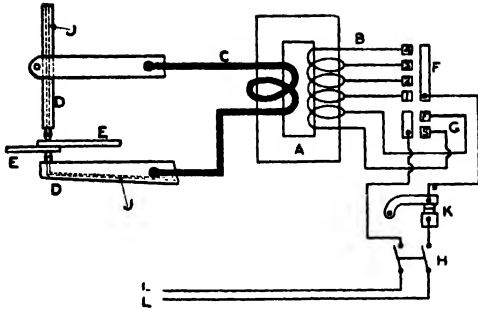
Lay-out of butt-welding machine. A. Magnetic circuit. B. Transformer primary winding. C. Transformer secondary winding. DD. Clamps for holding work to be welded. EE. Material to be welded. F. Plug box stops, 1, 2, 3, and 4. G. Plug box stops, fast and slow. H. Main switch. K. Automatic trip rod. L. Automatic cut-off switch.
